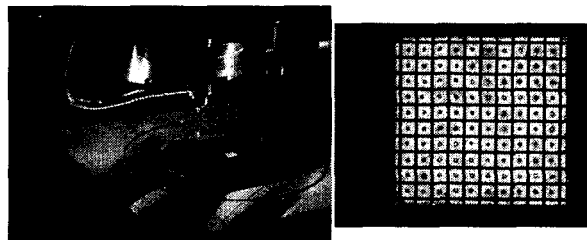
On the left, an electrode array, mounted in the holding fixture, is having solder bumps applied. On the right is an optical micrograph of a bumped electrode array, seated in the holding fixture.
